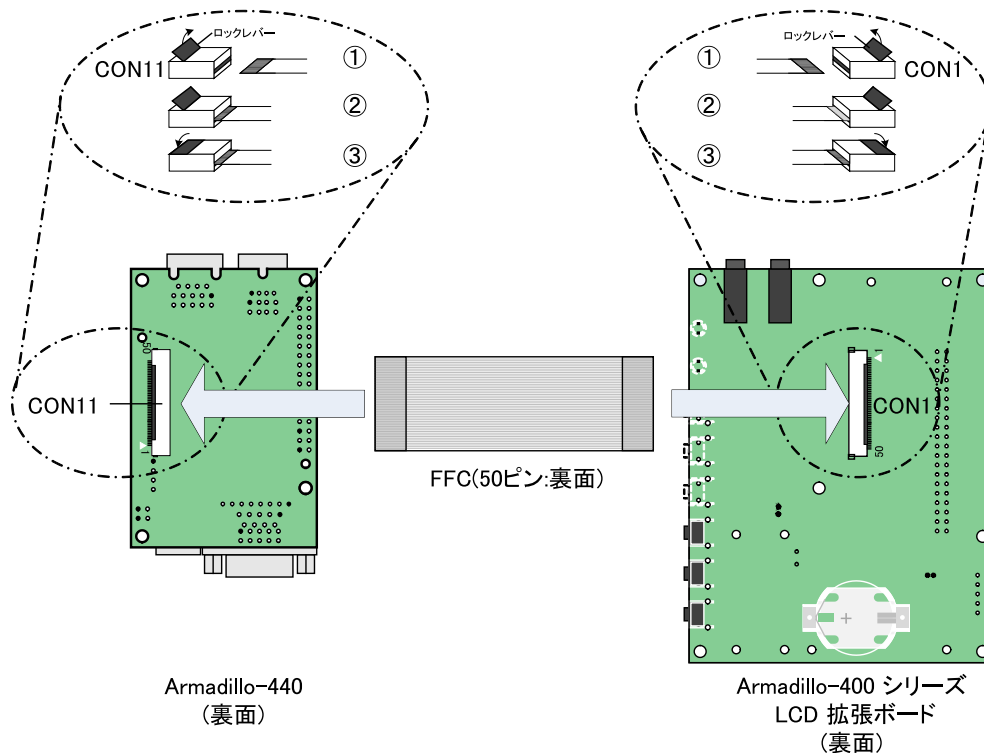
Connecting Armadillo-440 and LCD Expansion Board
